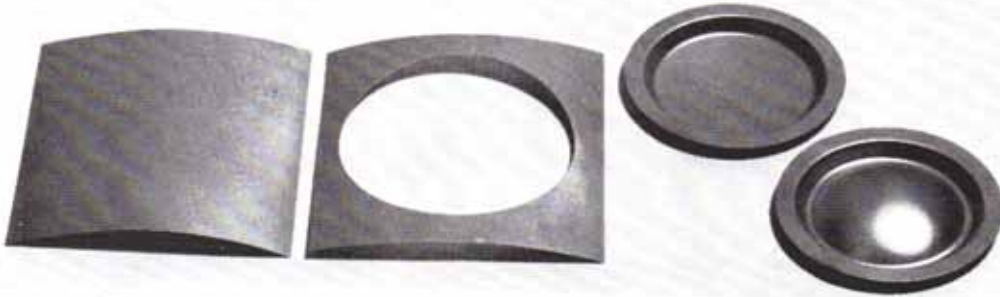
Steps in transforming a piece of metal into a rupture disk.
